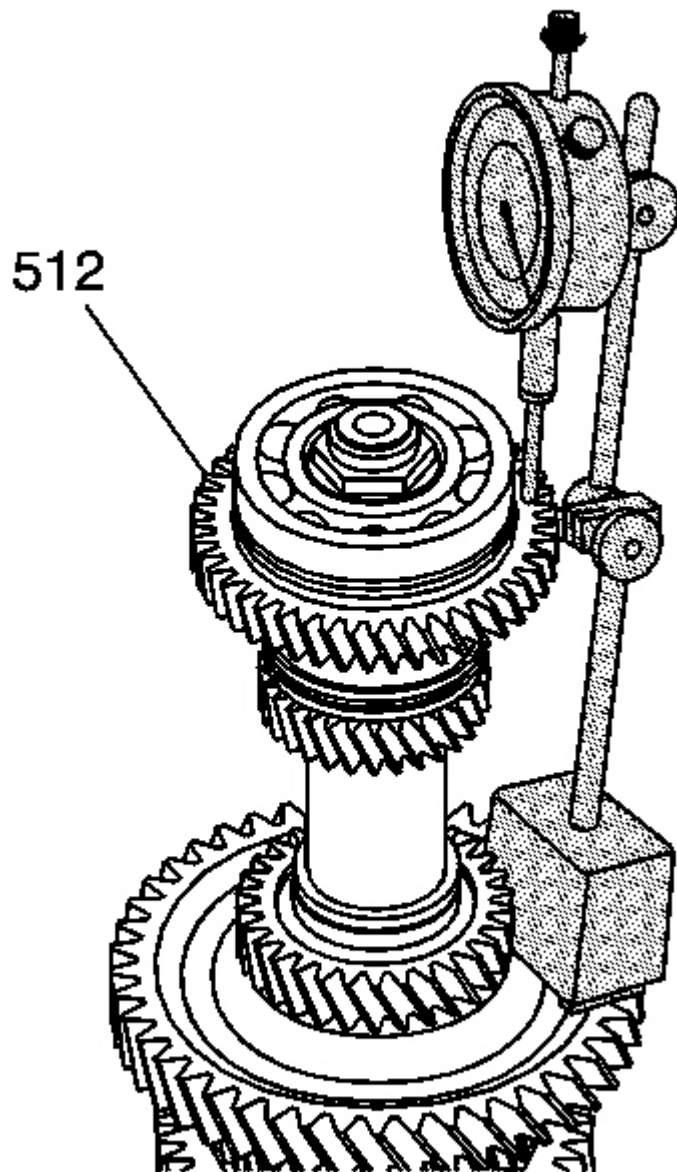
Measuring The Axial Clearance For Reverse Driven Gear
